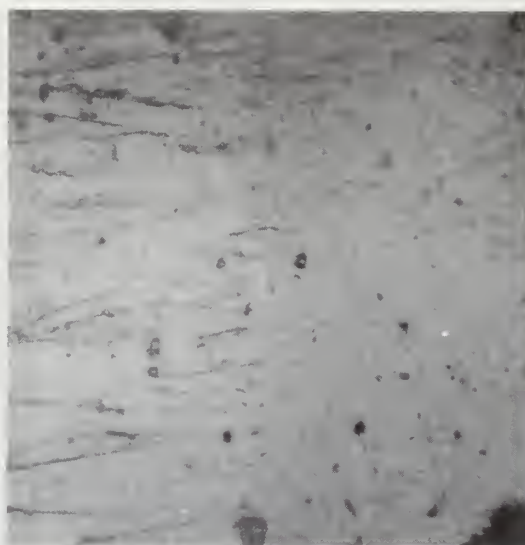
FRACTURED BIAXIAL SPECIMEN CASTINGS.
